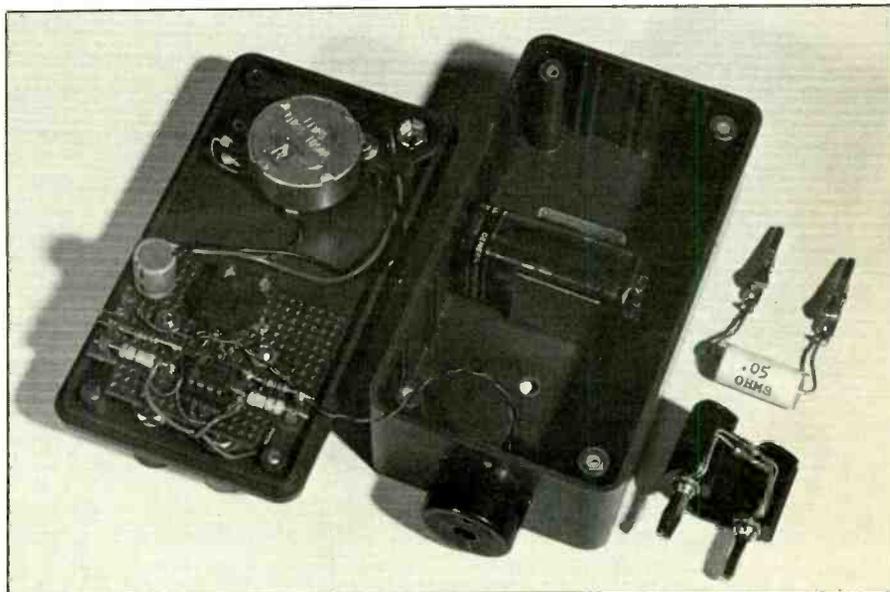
All components can be mounted and wired on perforated board that then mounts on front panel of enclosure.
